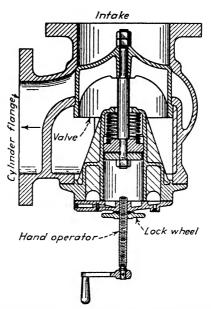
Cross section of intake valve on compressor in Fig. 137.
